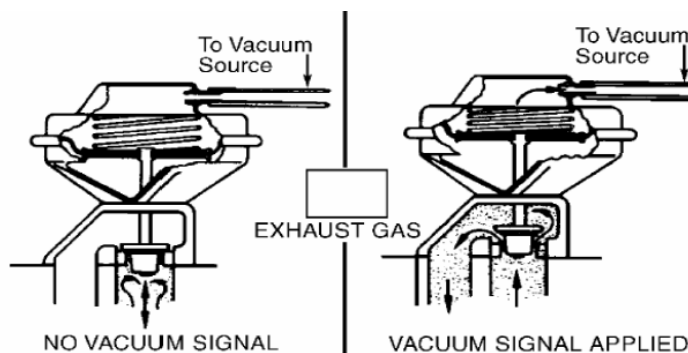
Schematic of a vacuum actuated EGR valve
